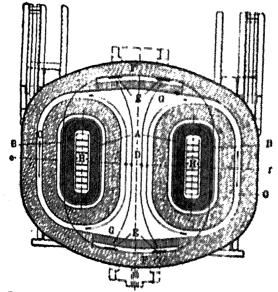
Plan of Röchling-Rodenhauser Electric Furnace,
